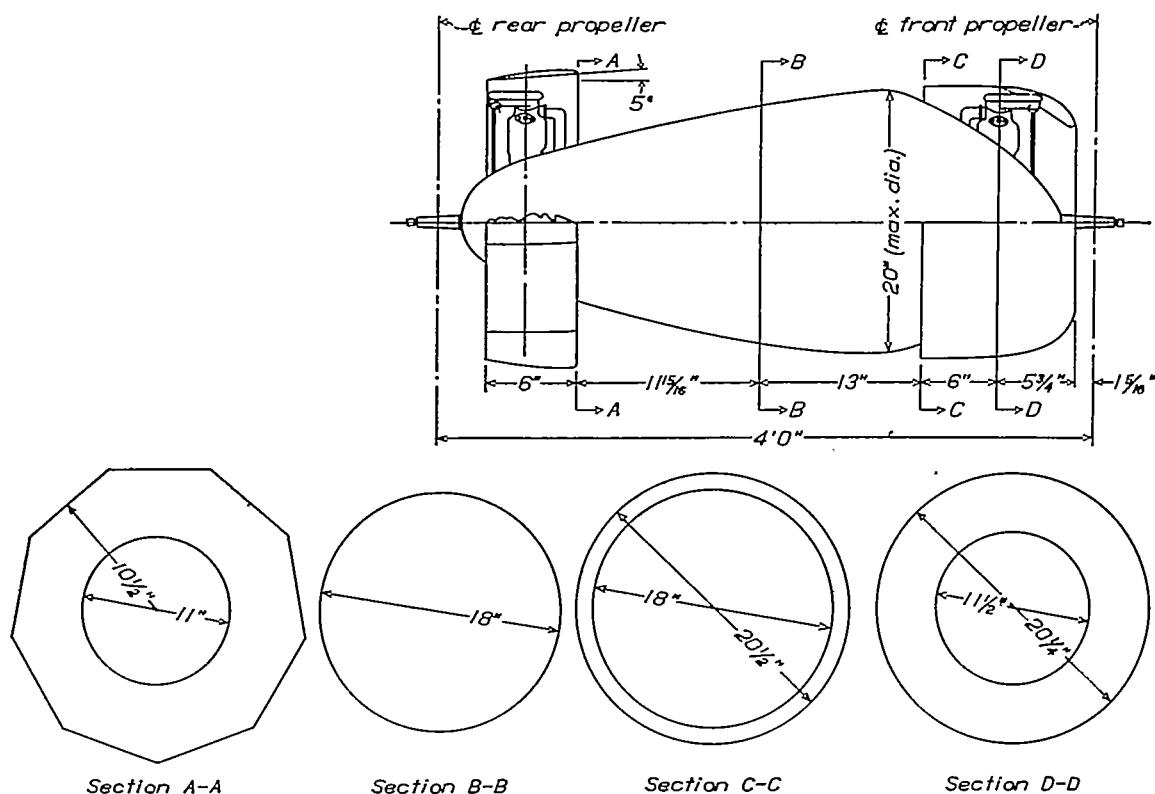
Large nacelle and engine assembly, propeller spacing 1 diameter.
